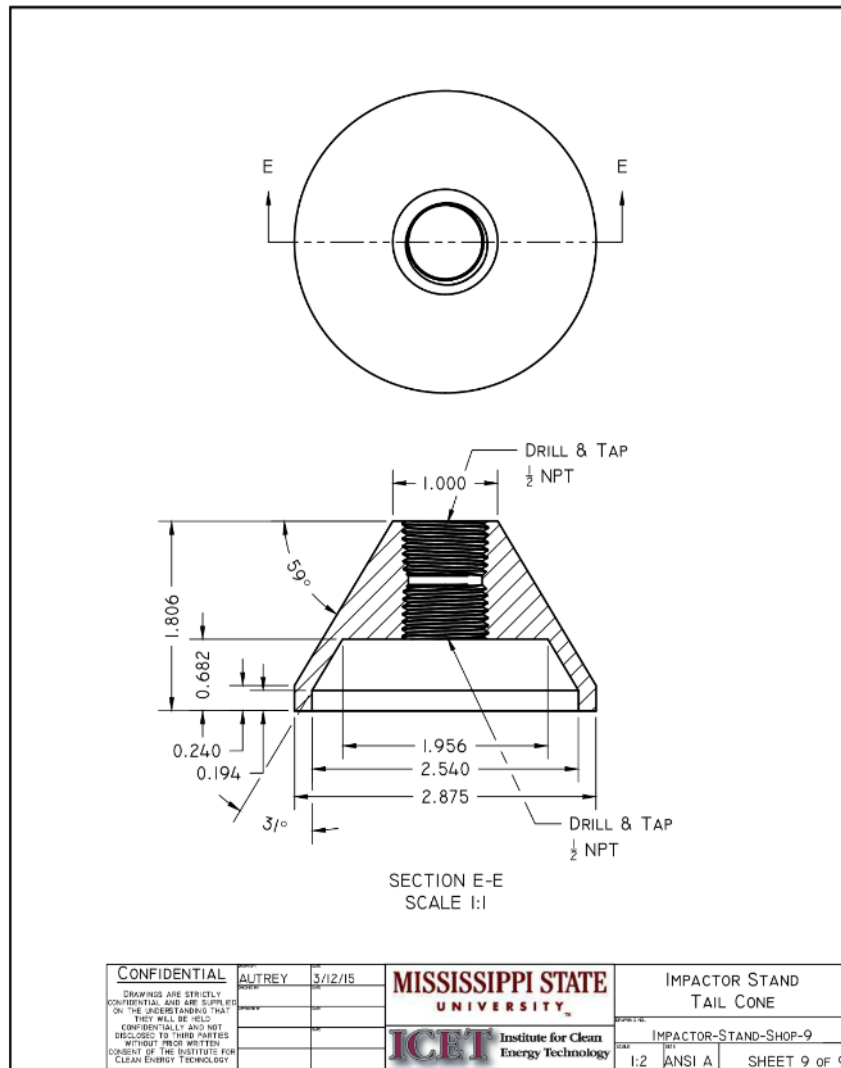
CAD drawing of the Pilat impactor tail cone.
